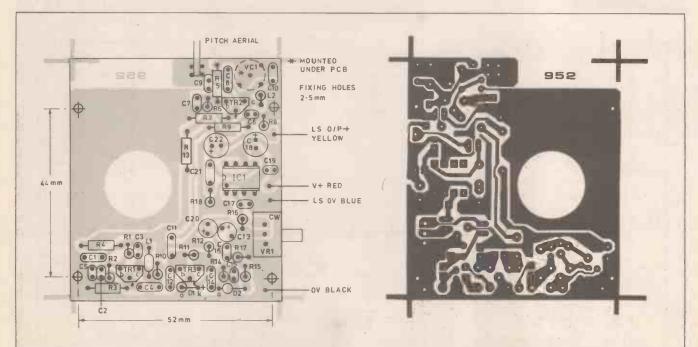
Printed circuit board component layout and full size underside copper foil master pattern for the Simple Theremin. The size of the speaker cutout may need to be enlarged to suit the size of magnet on the speaker used.
